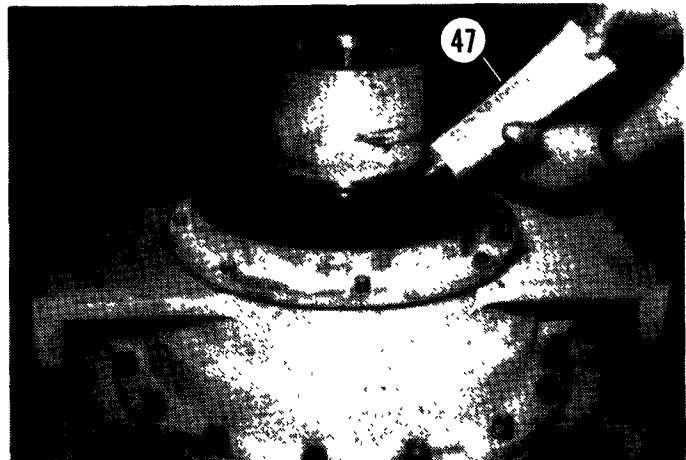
Rotary Gearcase Disassembly Procedure (Sheet 4).
